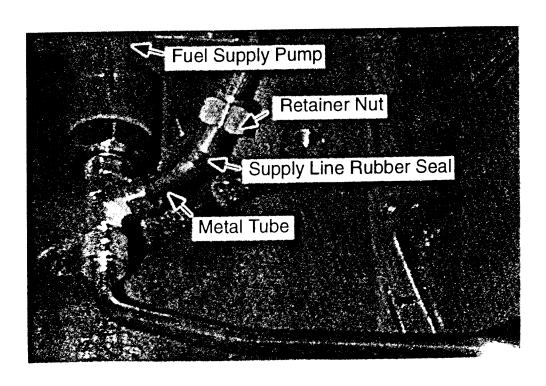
A. – Regulator Valve Fuel Supply Fitting At Three-Way Fitting
